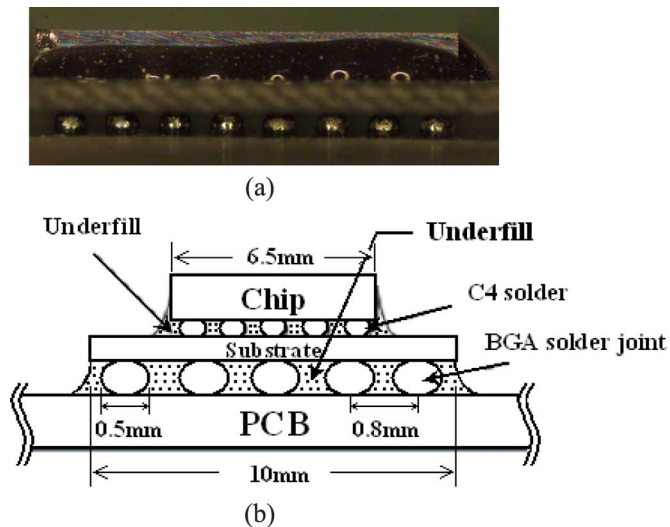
FC-CSP used for solder reflow test. (a) Side view of thermal cycle test specimen before underfilling BGA. (b) Schematic after underfilling BGA.
